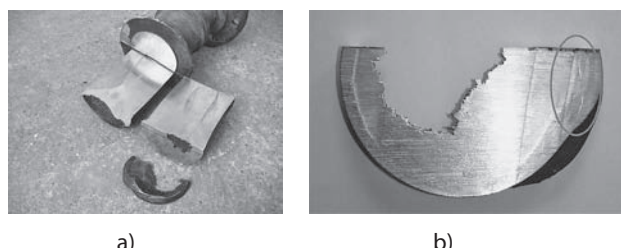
a) material taken from the broken part of turbine shaft, b) view of the separated end segment from the side of cross-section with crack
